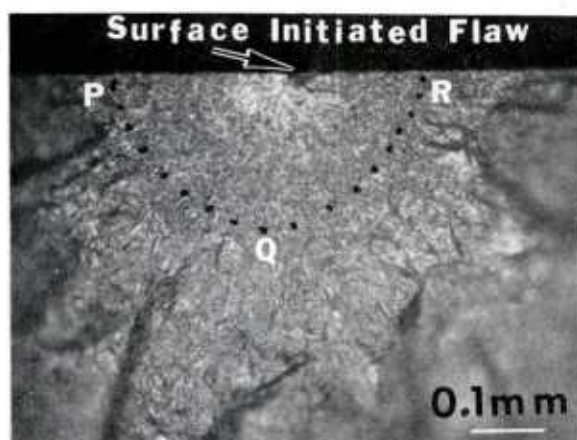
Fracture surface of a RBSN-NC350 specimen (uncracked) tested at 20°C showing surface initiated failure. The semi-circular, PQR, indicates the mirror region.
